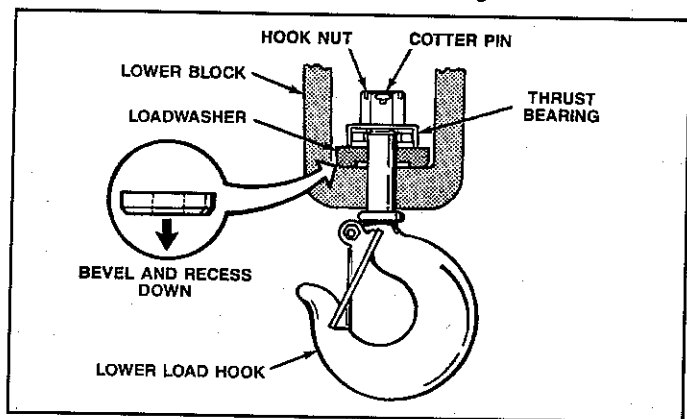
Installation of Load Washer (3 Through 6-Ton)
